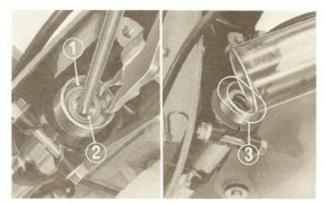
(1) Snap ring (2) Spring upper seat (3) Filler hole
